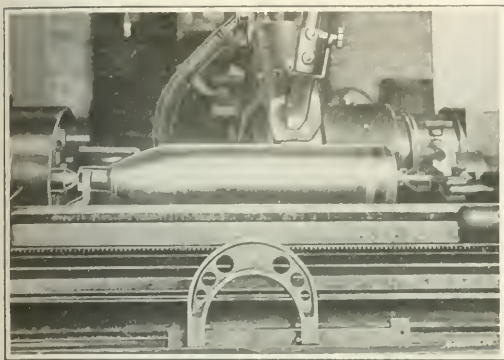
Grinding Body of Shell on Norton Plain Grinding Machine
